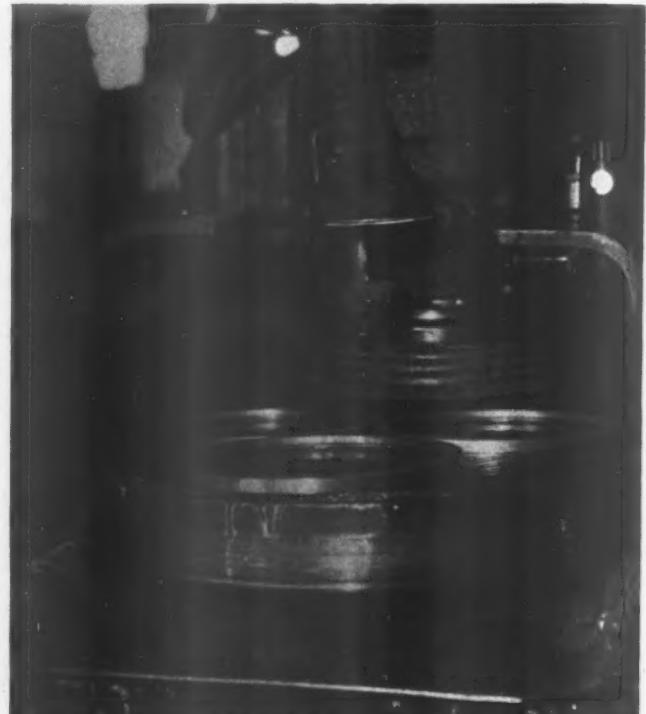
The rotary surface grinder used for grinding the plain side of the rings to snap-gage dimensions
